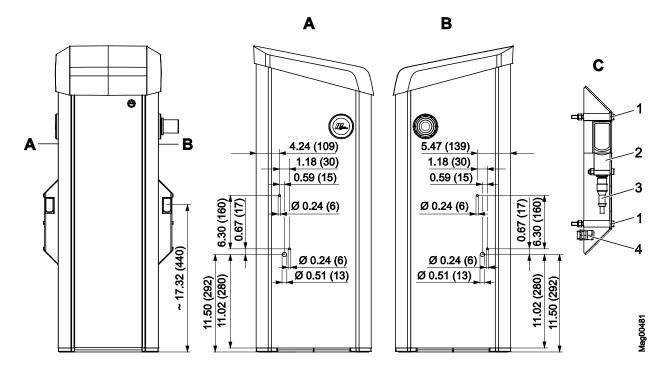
Assemble of the transmitter's light barrier housing on the barrier housing
